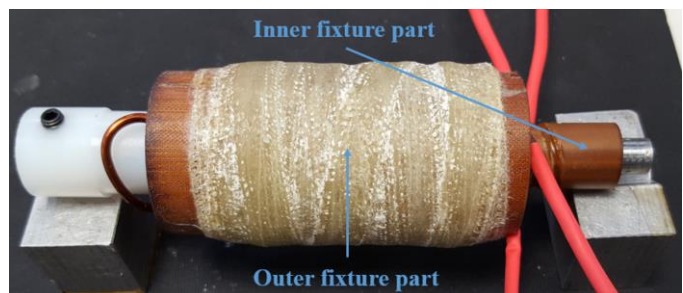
Assembled magnetizing fixture with overall fibreglass banding.
